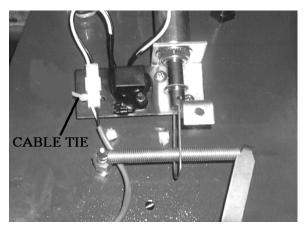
CONNECT WIRES, CABLE TIE TO BOARD
